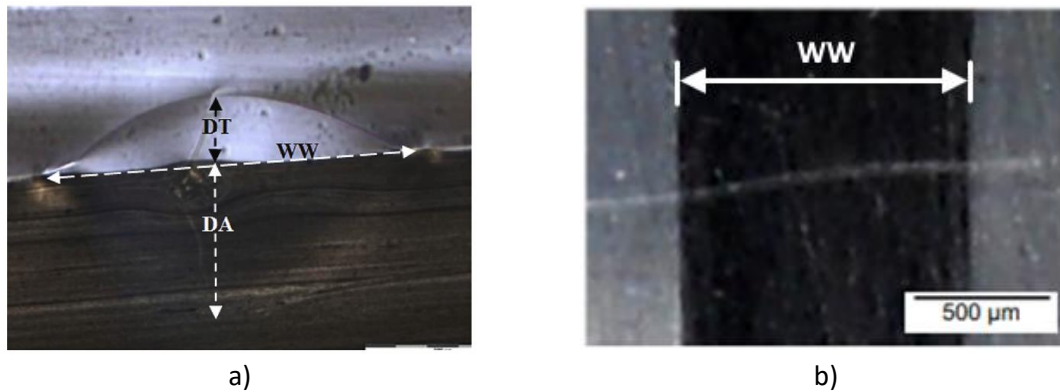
a) cross-sectional view of the weld pool, where WW= weld width, DT = depth of penetration (LT), DA = depth of penetration (LA) [28]; b) Top view of the weld pool [45].
